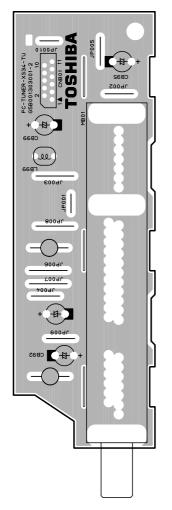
EU03C Front Center PC Broad (Top side)
